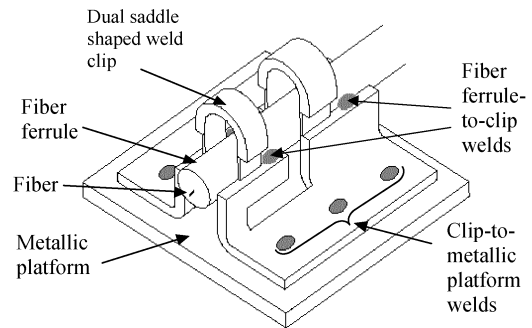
Optical fiber is bonded onto the optical subassembly by welding of ferrule-to-clip and clip-to-metallic platform.
